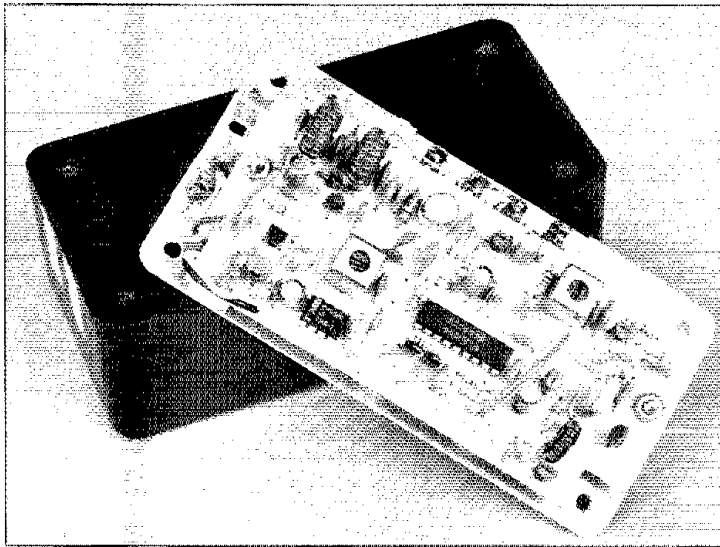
This completed transceiver is mounted on the enclosure cover. Simply turn it over, insert four screws and the unit is finished.
